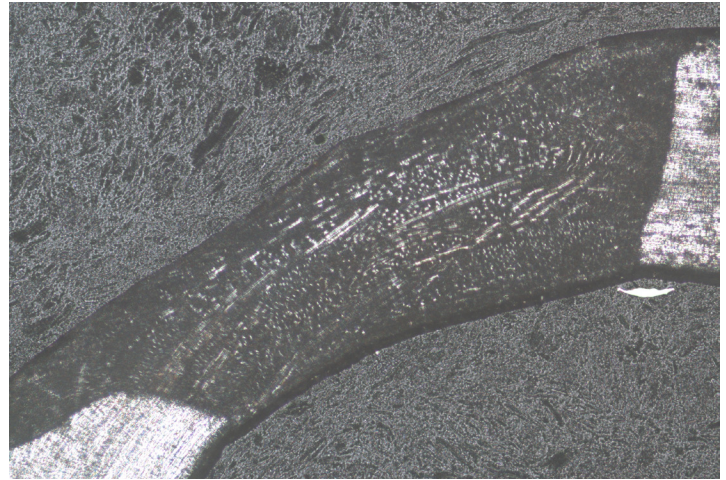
Improperly adjusted or worn weld box rolls cause incorrect weld seam thickness.
